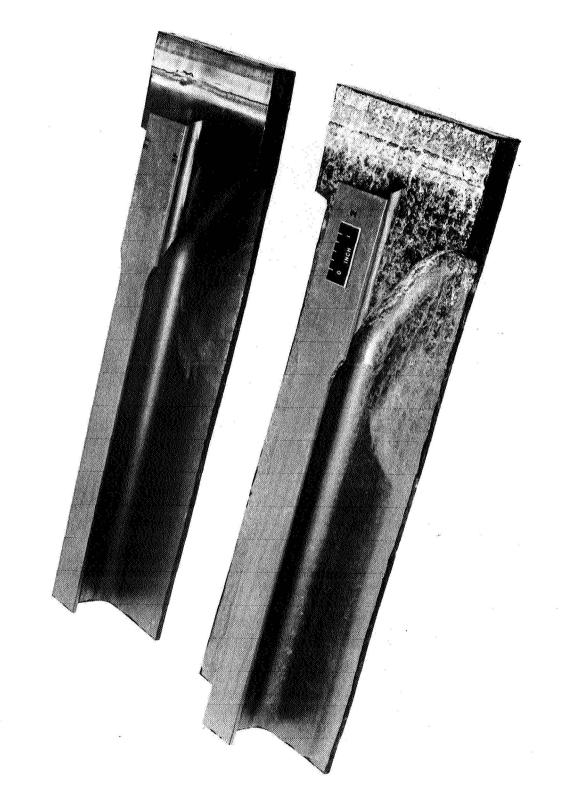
Welded Configuration Section 0.87 Inch Thick Weld, With and Without Touch-up Treatment - 24 Hours Salt Spray
